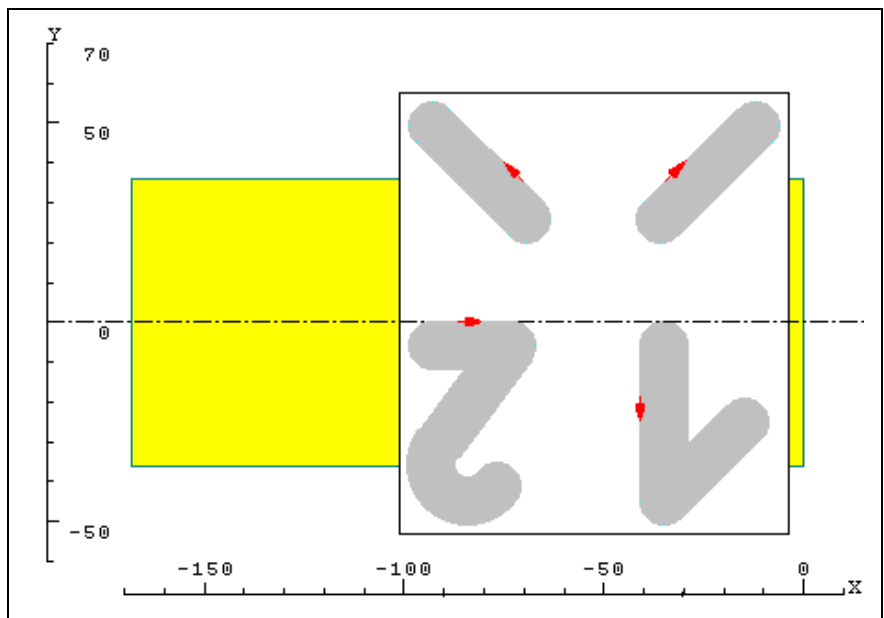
Lateral cylinder surface machining with coordinate transformation
